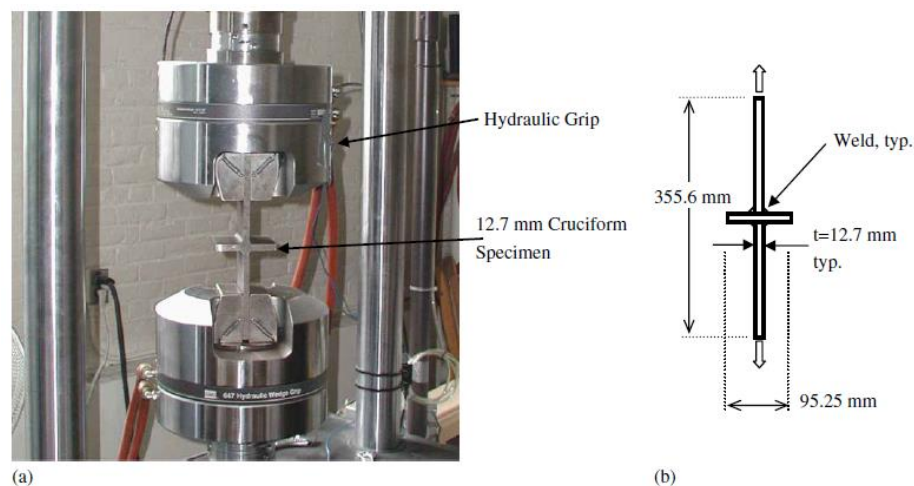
a) picture of the cruciform test specimen and the test setup b) geometrical dimensions of the test specimen (Caccese et al., 2006)
